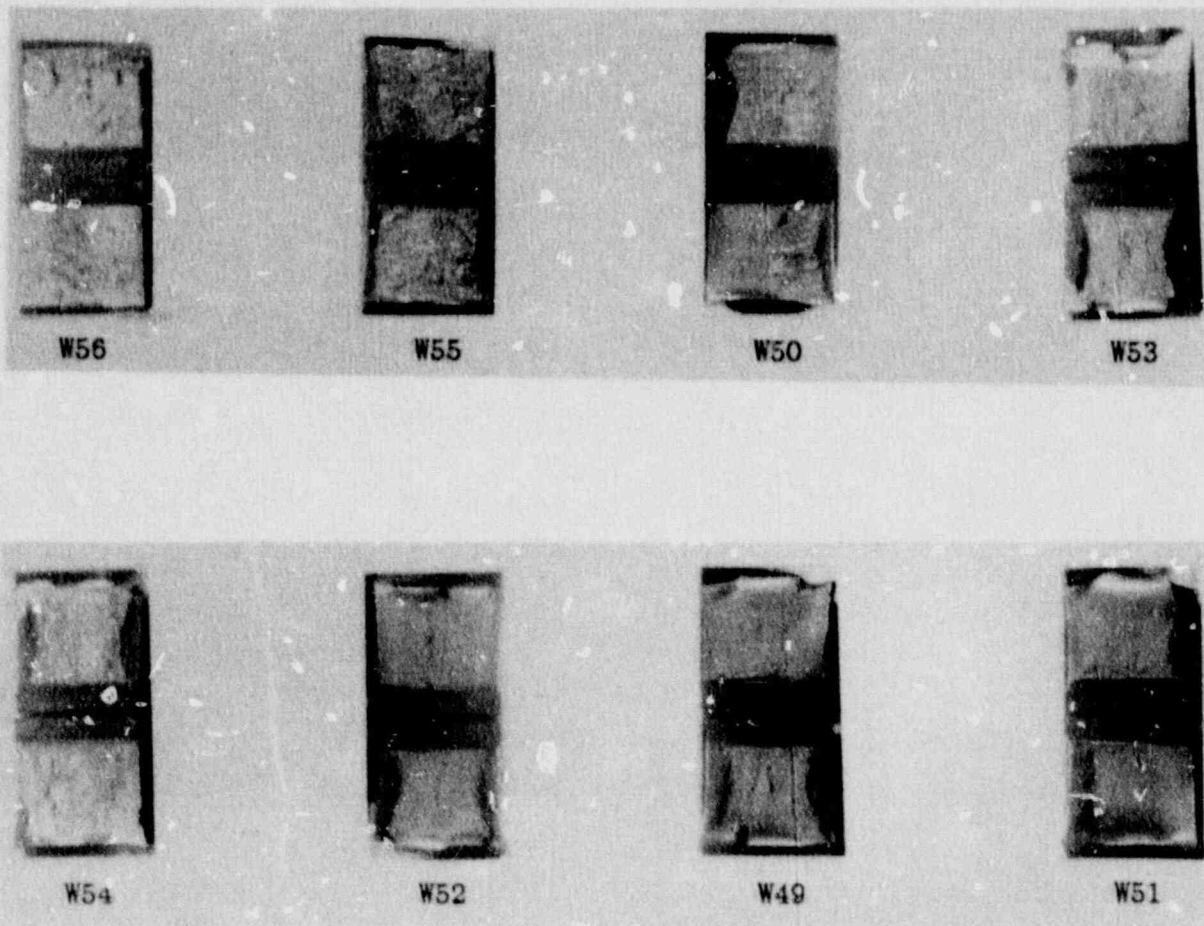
CHARPY IMPACT SPECIMEN FRACTURE SURFACES FOR ZION UNIT 2 REACTOR
